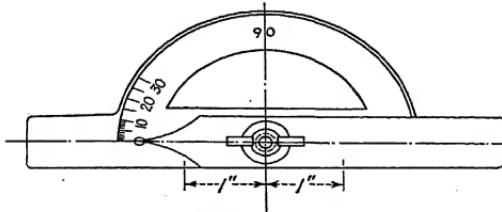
Protractor for checking the amount of bend in a propeller blade.
